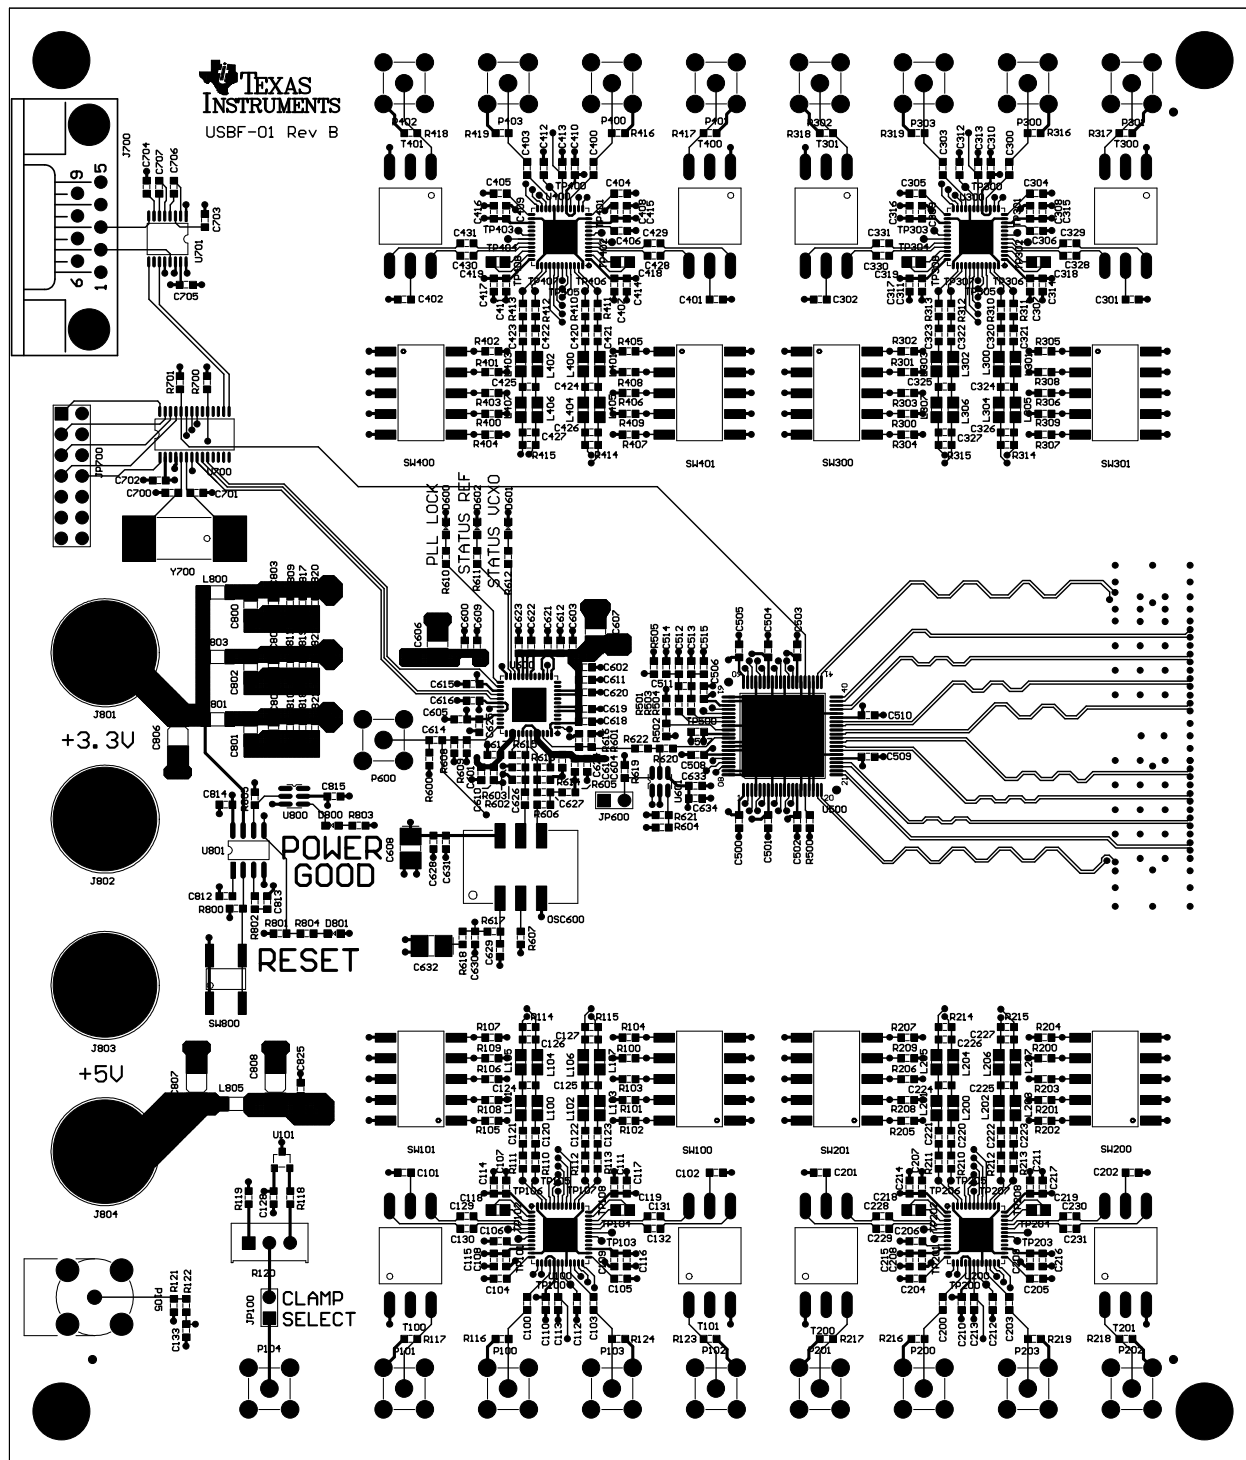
Demonstration Platform PCB Assembly (Top Layer)
